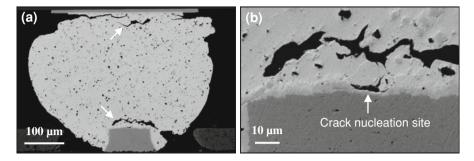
BSE images of a cross-section through a Sn-0.7%Cu-0.1%Ni solder joint that failed after 577 cycles of thermal cycling between -40° C and 125° C. a Overview of the solder joint: fatigue-like cracks (indicated by *arrows*) propagate close to both upper and lower bond pads. b Crack nucleation between the solder bulk and the interfacial IMC layer. Data from imec
